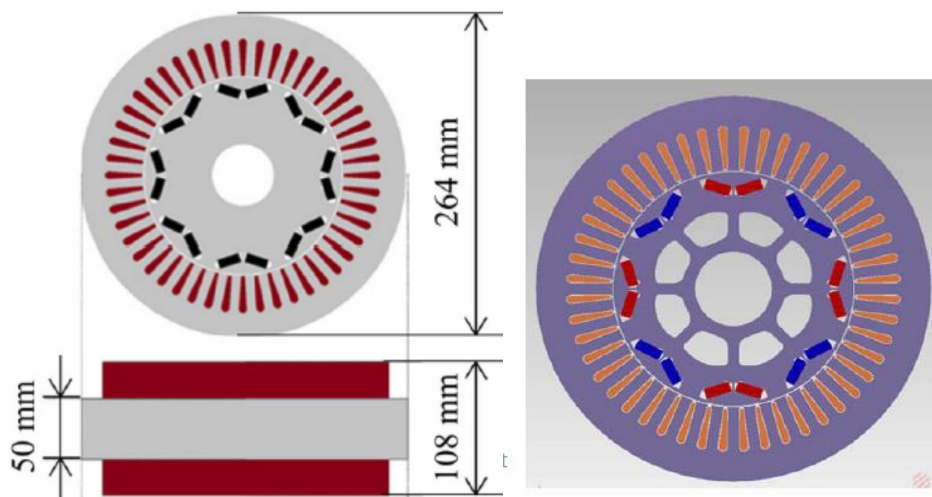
Toyota Prius 3rd generation electric machine cross section (E-Machine [6]-[8])
